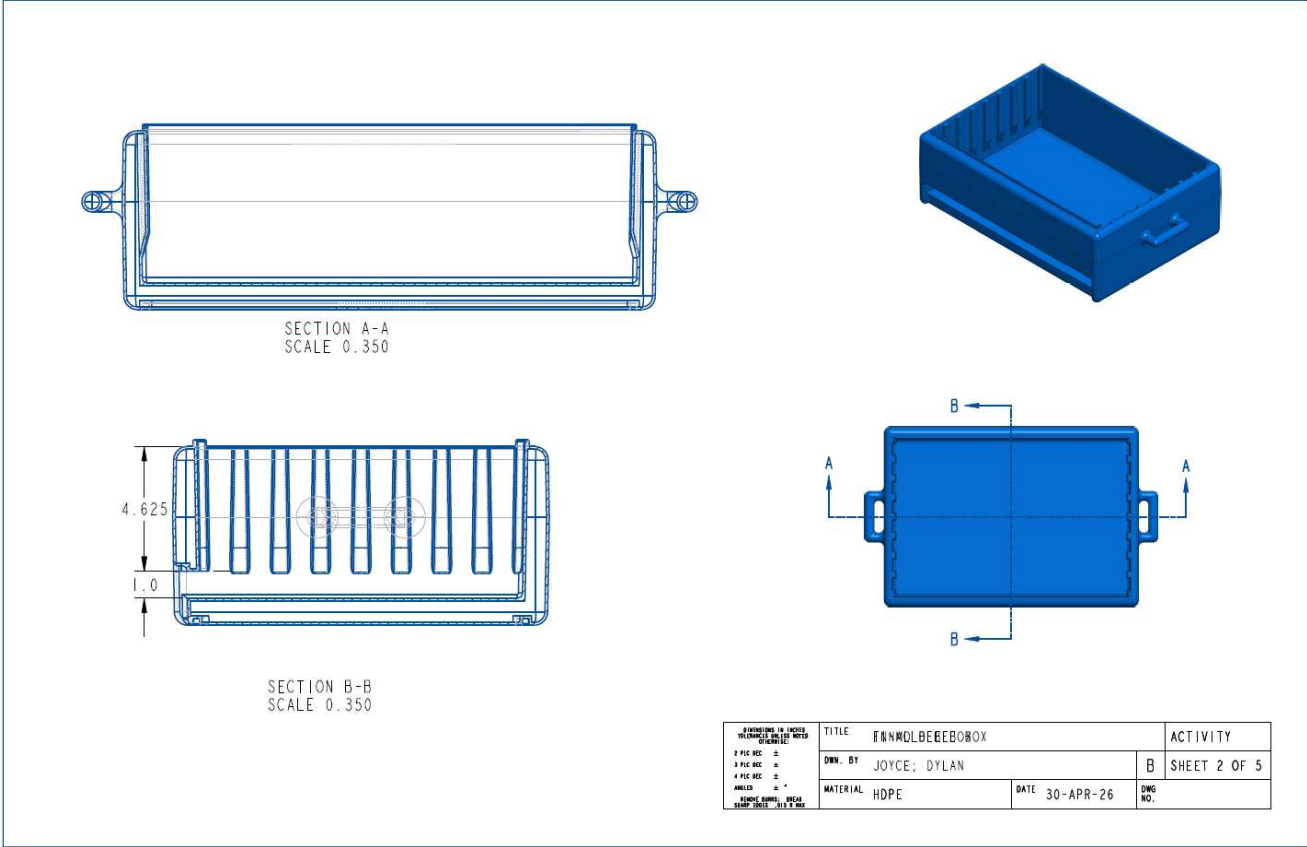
Dimensioned Drawing of Post Assembly Bee Box
